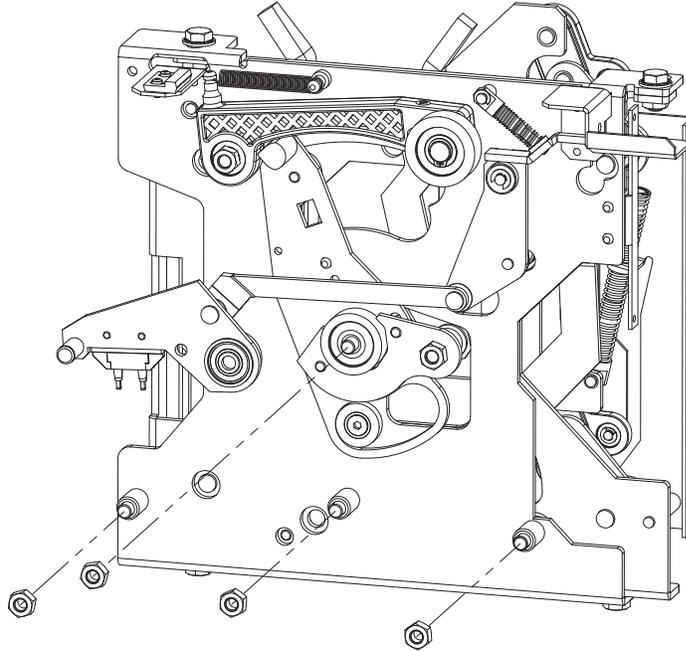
Remove Shipping Nuts from Rear of Clutch
